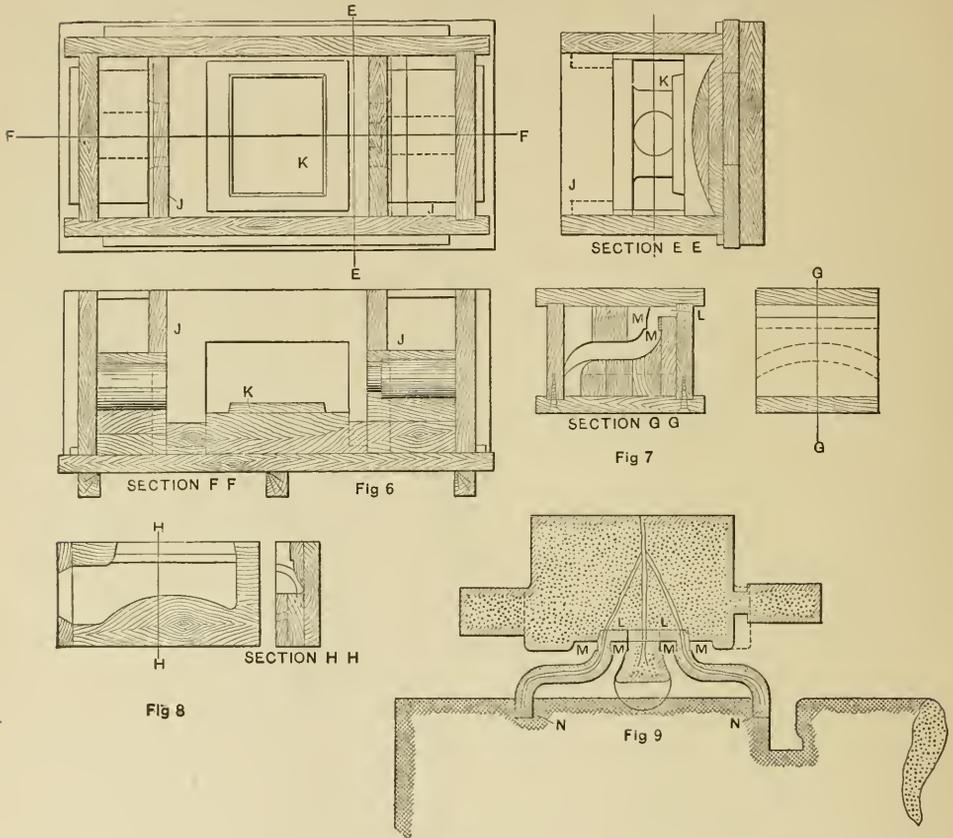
Steam Chest Core Box. Fig. 7. Steam Port Core Box. Fig. 8. Exhaust Chamber Core Box. Fig. 9. Assembled Cores
